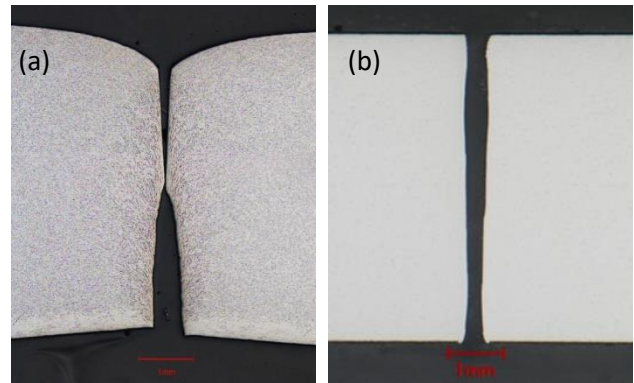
Cross-sectional cutting shape by (a) mechanical shear, (b) laser cutting
